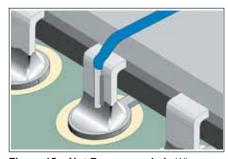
Not Recommended* Wire soldered to lead, wire over component.
